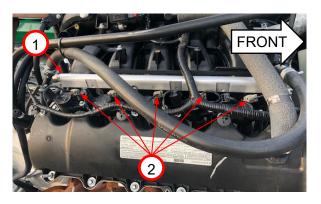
Fuel rail (1), fuel injector connectors (2). NOTE: Passenger side shown; driver side similar.
